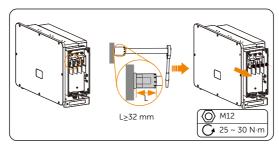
Disassembling the M12 nut (40 kW ~ 70 kW / 75 kW ~ 125 kW inverter for example)
